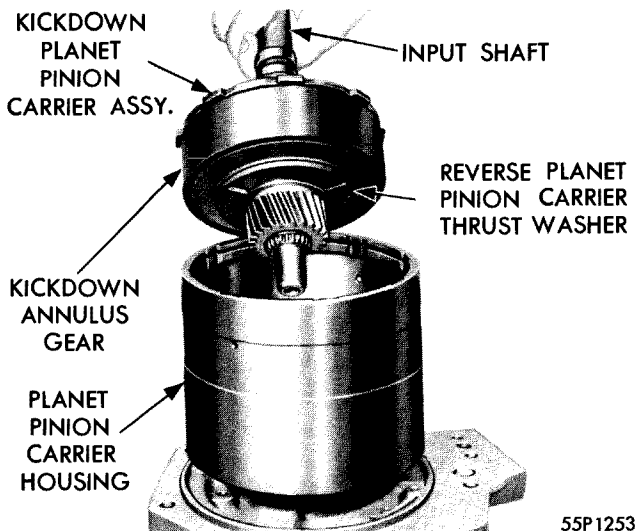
Removal or Installation of Input Shaft and Carrier Assembly
